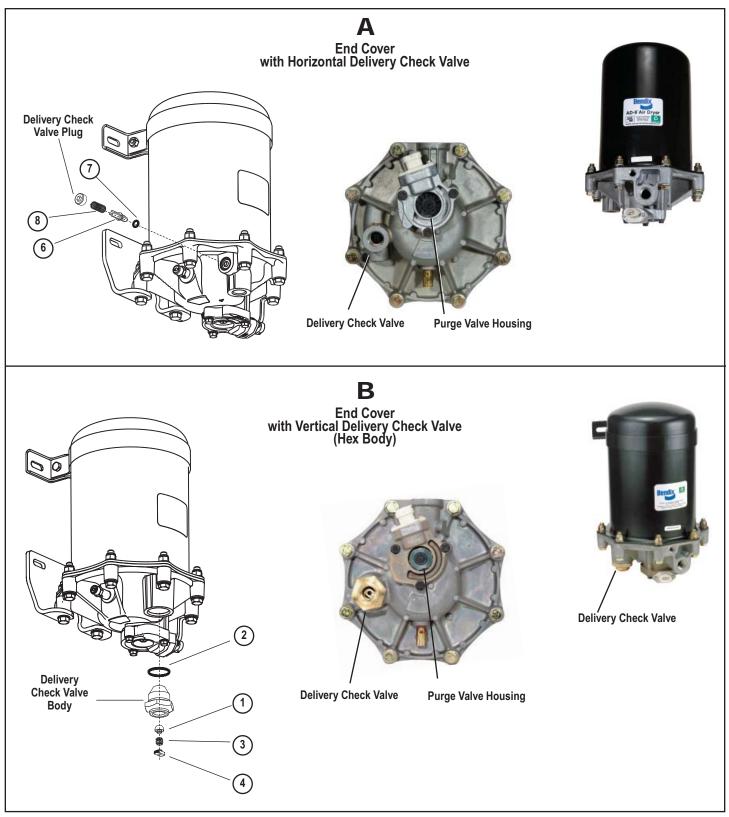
Bendix® AD-9® Air Dryer Universal Check Valve Kit
